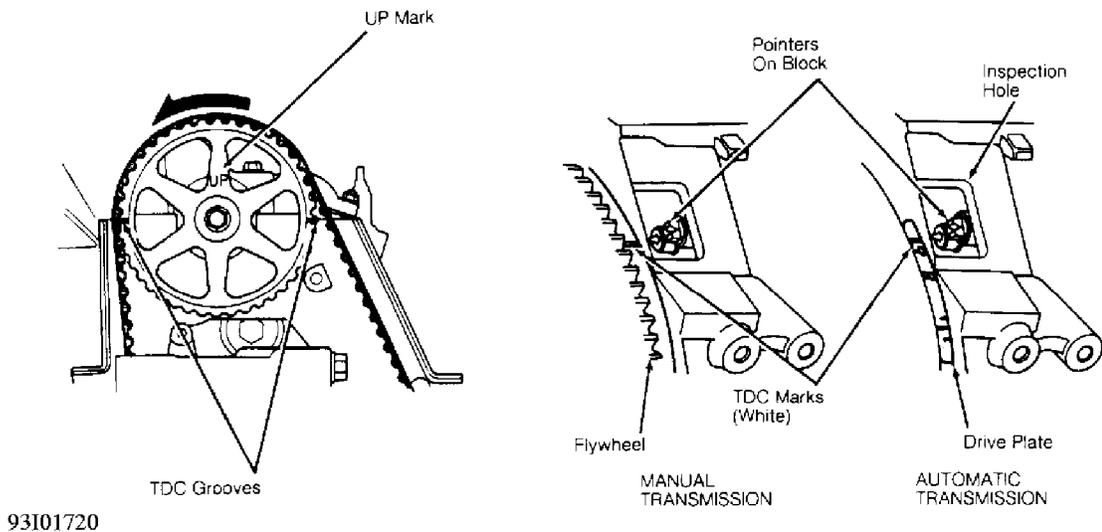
Positioning Camshaft Sprocket For Valve Adjustment (2.2L SOHC)
